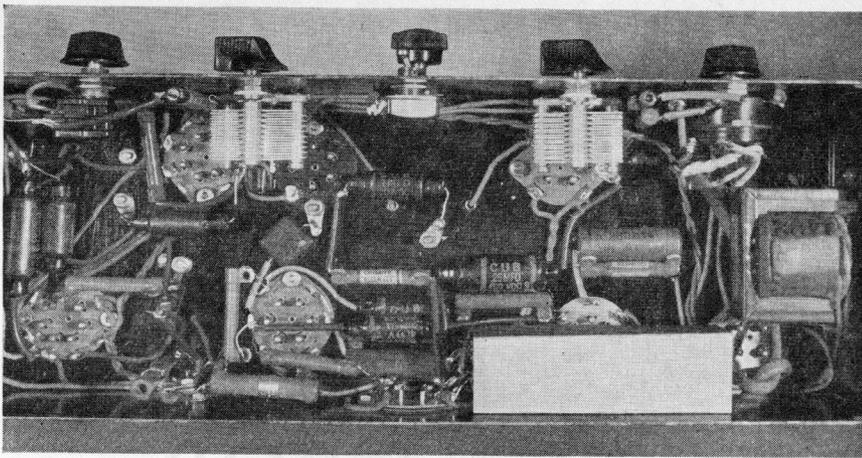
Bottom view of the receiver chassis, showing wiring and location of parts.
